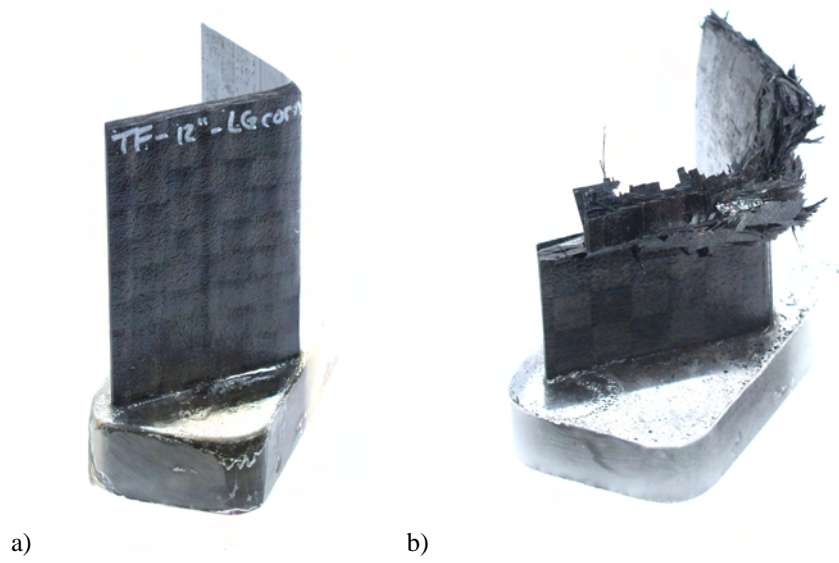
Large corner element, specimen V, before (a) and after crush testing (b).
